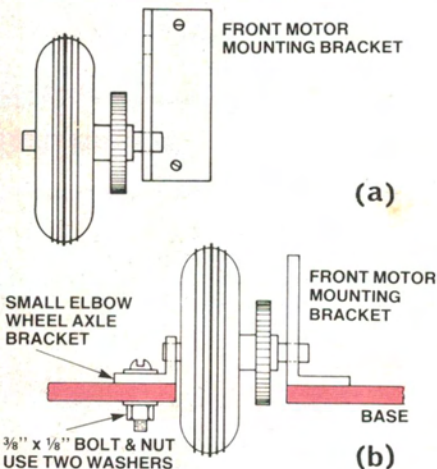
Mounting the wheel assembly to the left hand front motor bracket. (a) Insert the nylon gear end of the axle in the appropriate hole in the front motor bracket (view looking down). (b) Support the other end of the axle with the small axle elbow bracket and temporarily bolt it in place. The right hand wheel assembly mounts in a similar way.
